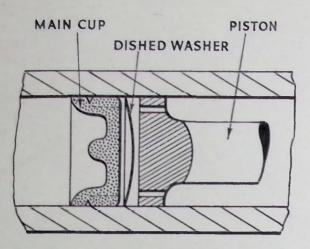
Section through Master Cylinder showing position of Dished Washer.
